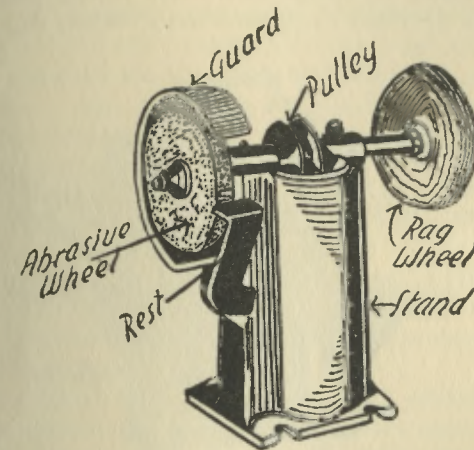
THE WARD HEAVY DUTY BENCH GRINDER
